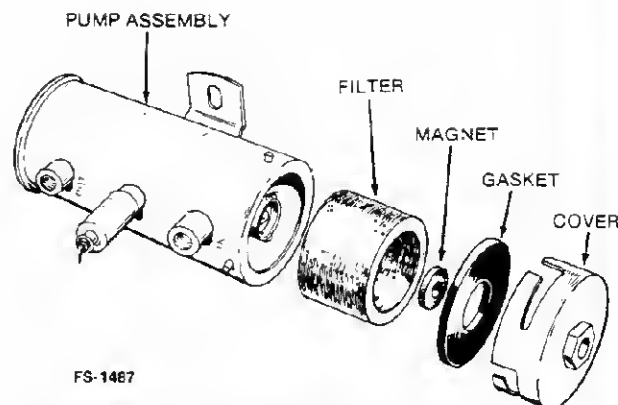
REMOVAL OF MAGNET AND FILTER
